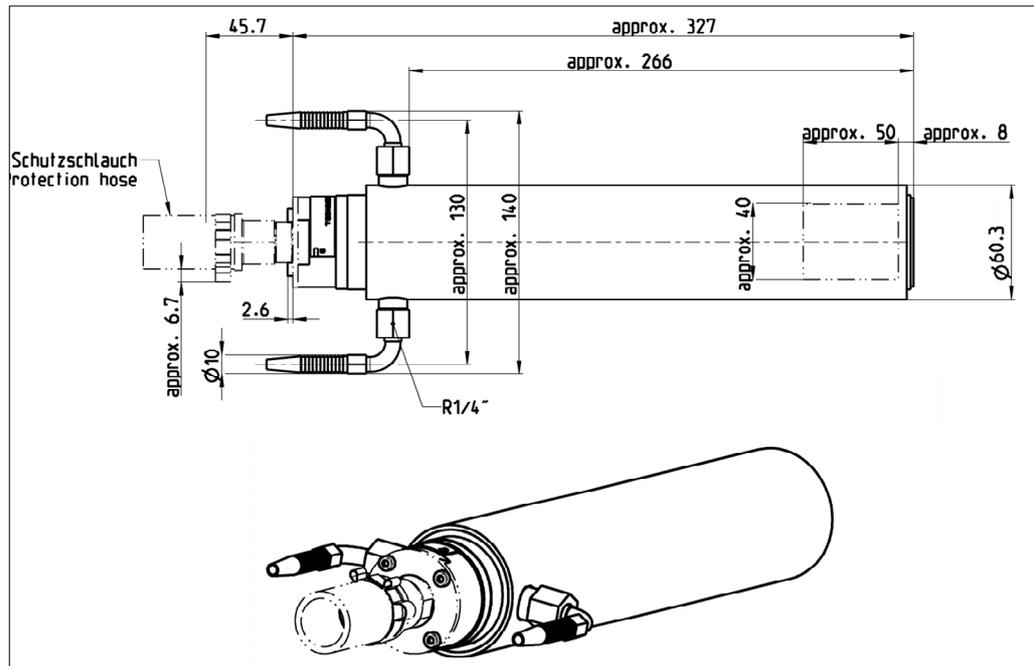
GAMMAcast detector LB 6739 and LB 6750, dimensional drawing with water cooling system
